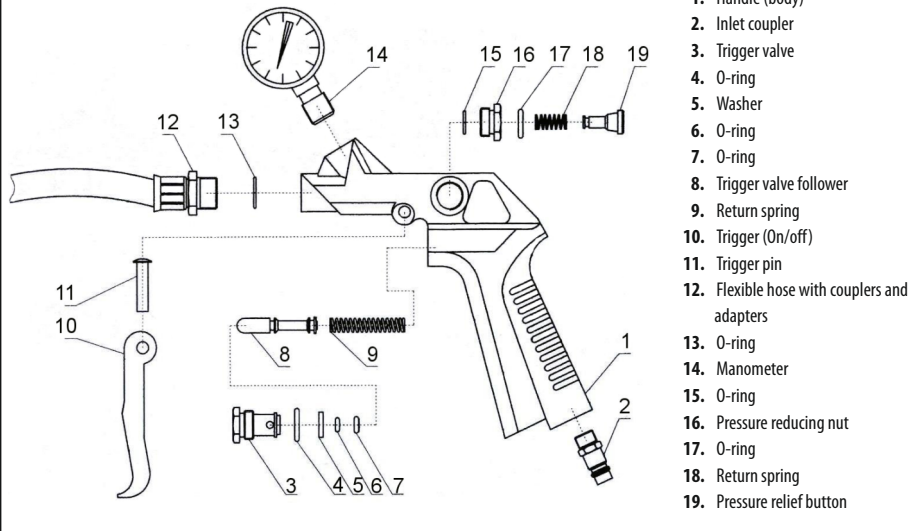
Assembly drawing for the tyre inflating tool (not suitable for mechanical vehicles):
